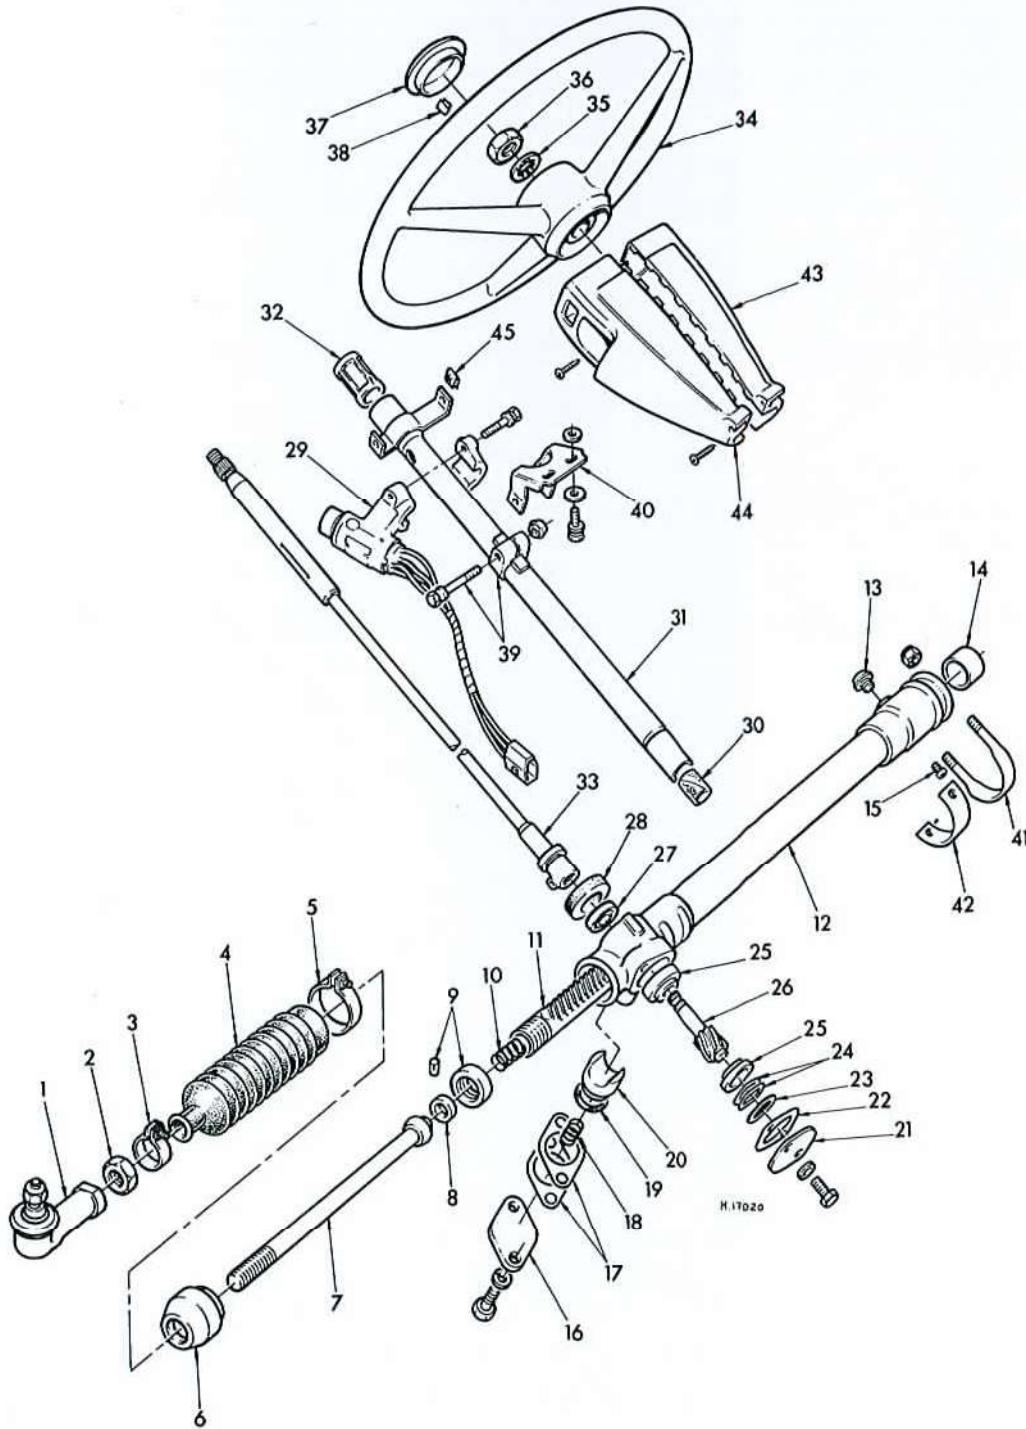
Exploded view of the steering gear (Sec 30)
